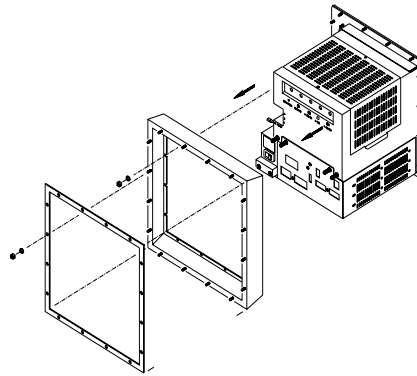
PanelMate Power Series 2000 Color Keypad Unit (Model 2700) Mounting Collar Assembly
